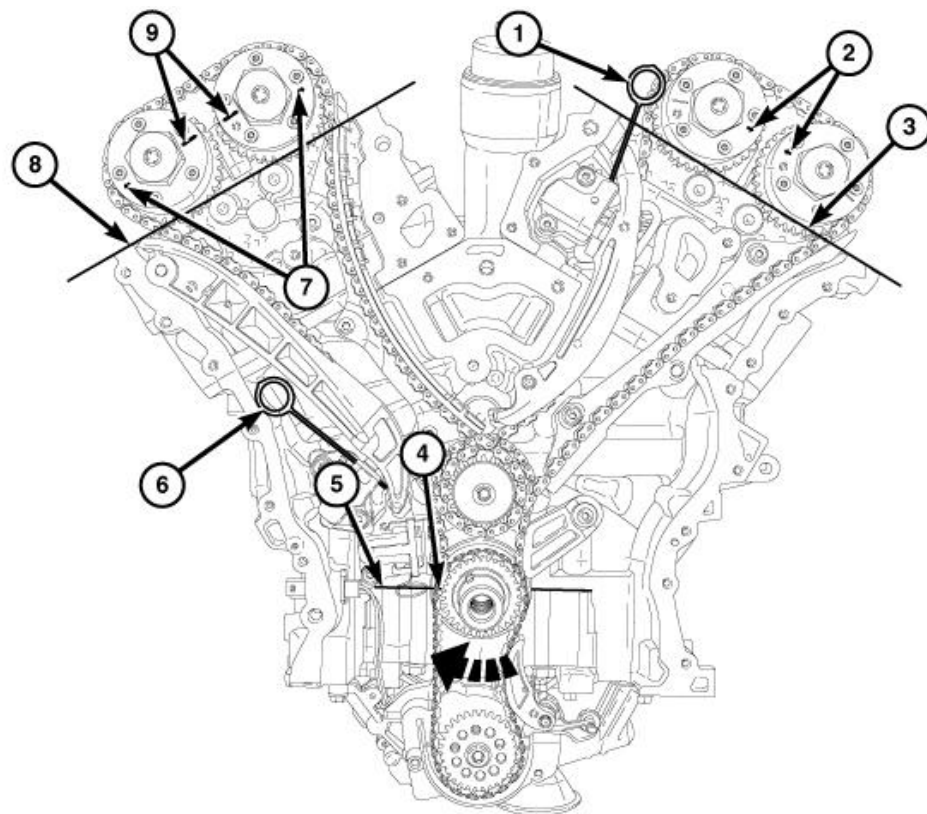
Phaser Timing Marks, Oil Control Valves & LH Camshaft Phaser Lock
